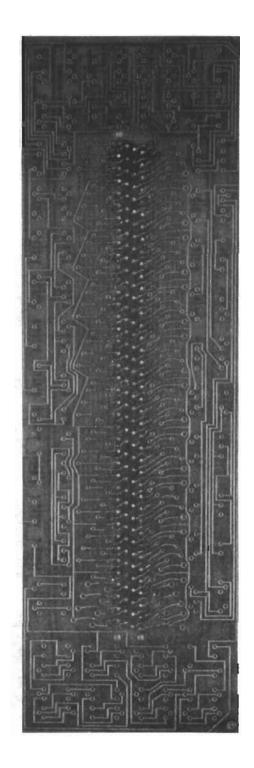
Thin Film Resistor - Diode Assembly - Rear View
